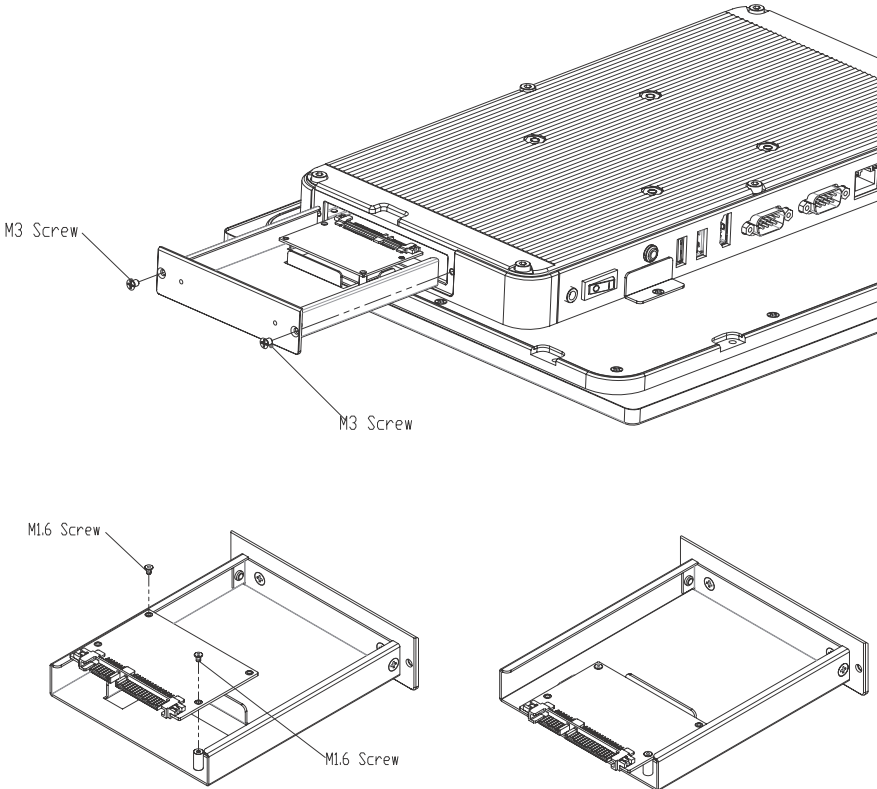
STC-1205/1505 SATA Slim Drive Installation (STC-1205 shown)
